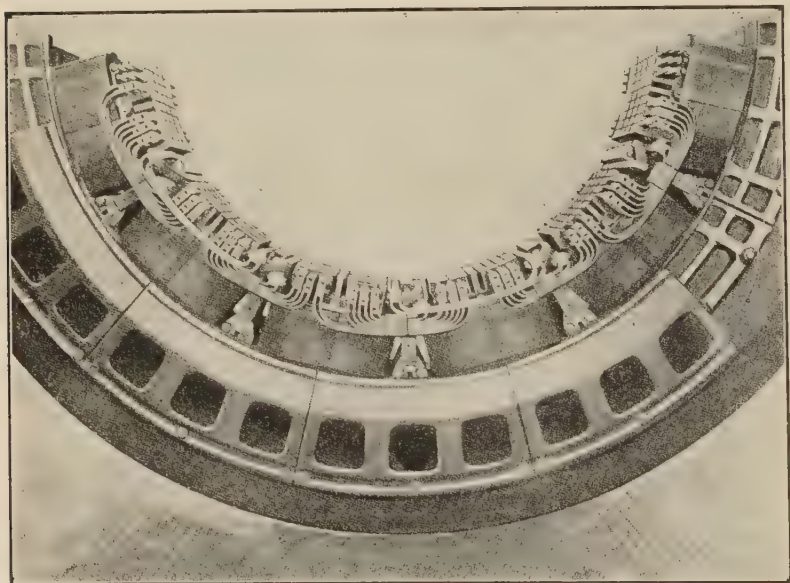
Yoke of machine with interpoles and compensating windings.
